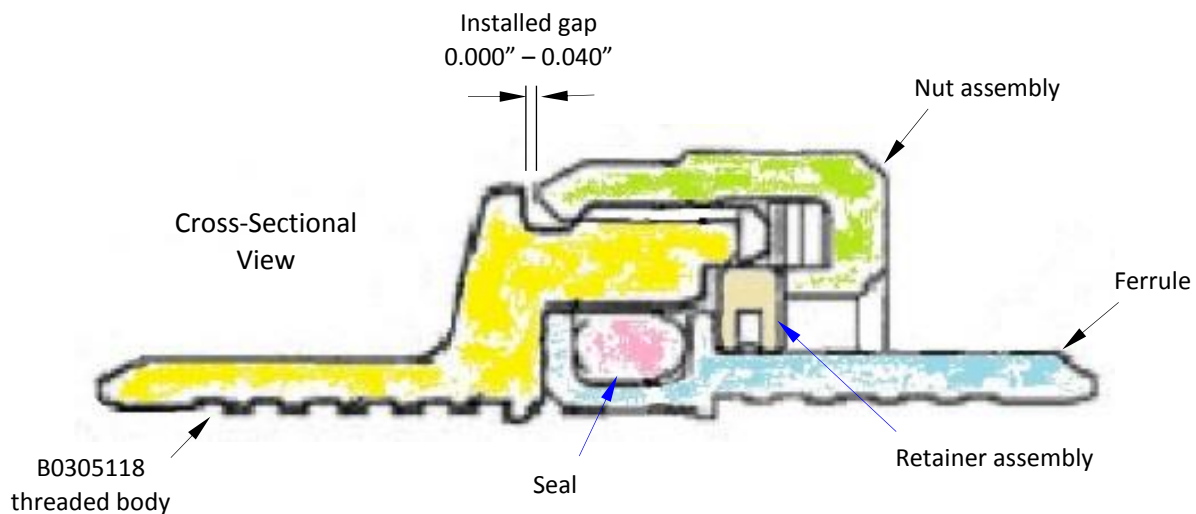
Installed Gap (ref. B0305118 Threaded Body)
